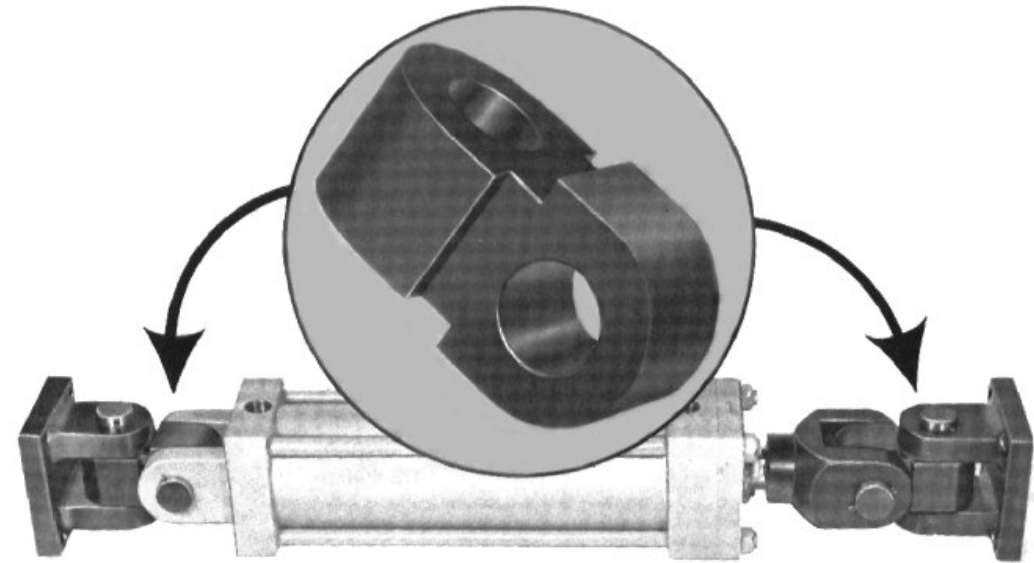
Universal alignment mounting accessory for fluid cylinders. (Courtesy of Sheffer Corp., Cincinnati, Ohio.)
